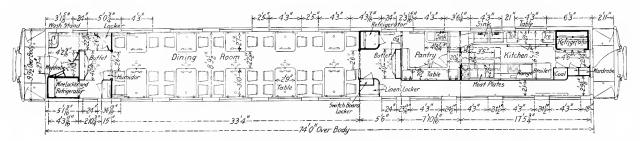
Floor Plan of Philadelphia & Reading Dining Car Shown in Fig. 166.
